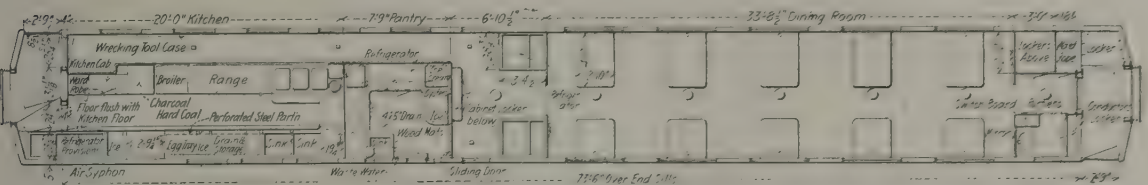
Floor Plan of Steel Dining Car. Builder, The Pullman Company.
